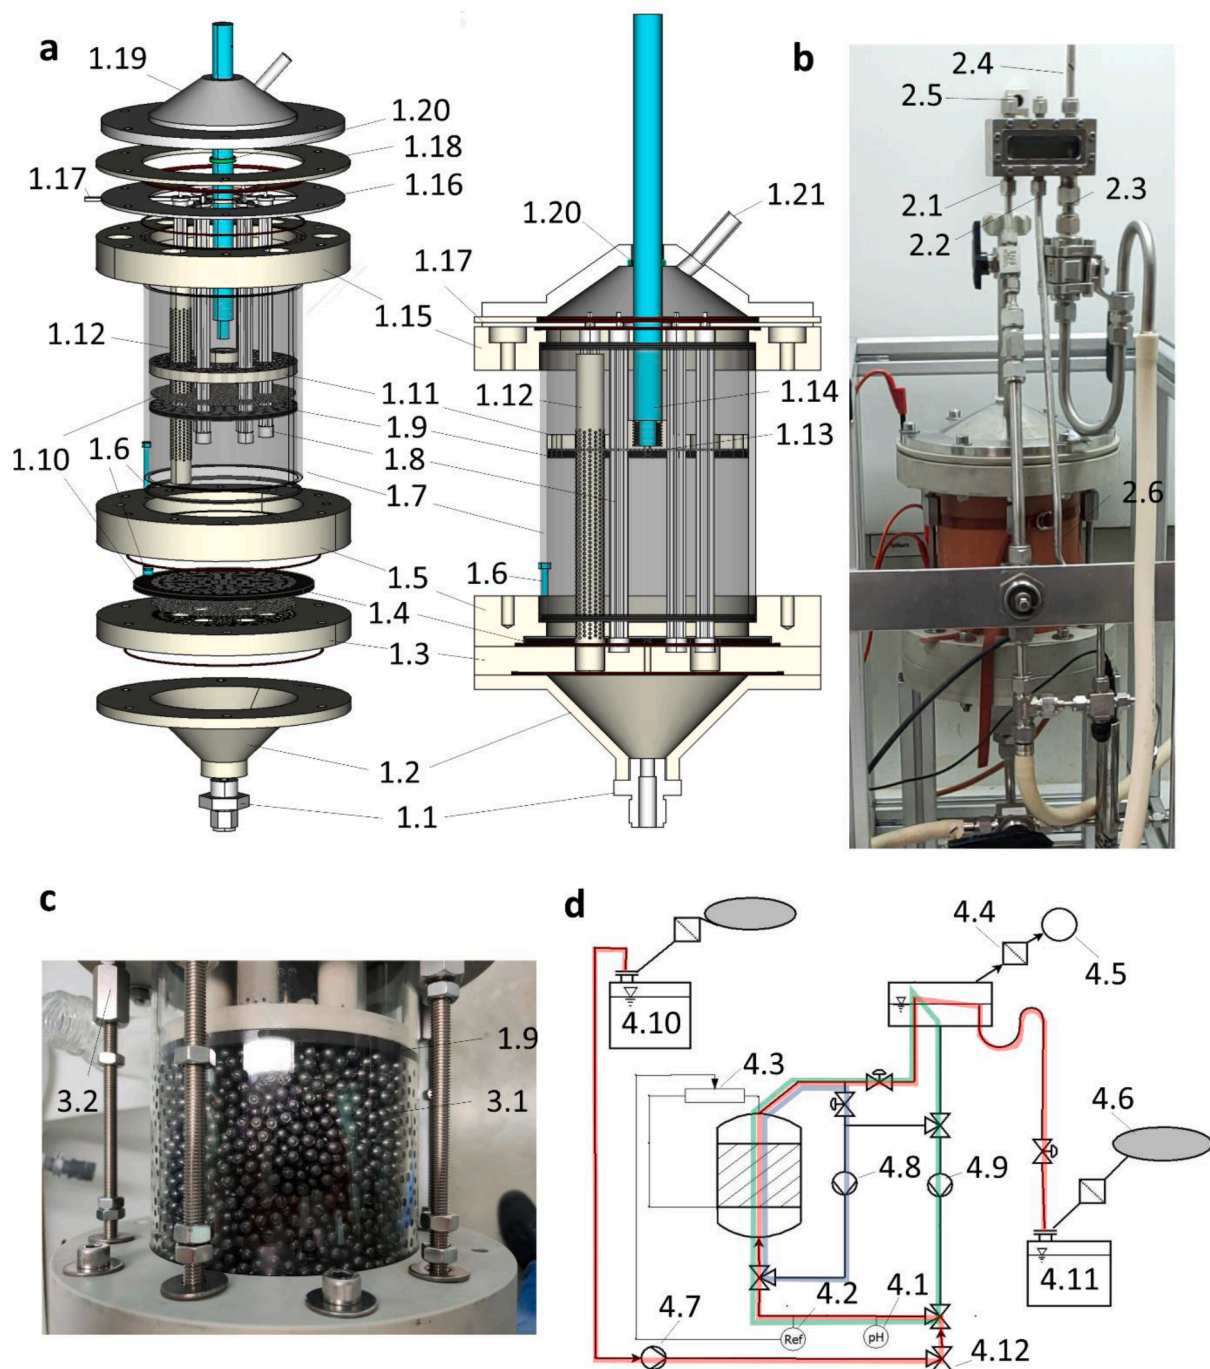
a: Exploded view drawing (left) and longitudinal section (right) of the CAD model of the bioelectrochemical packed-bed reactor /biofilter. Inlet of the fluid (1.1), inlet chamber (1.2), lower flange components (1.3 and 1.5), lower perforated graphite plate (1.4), titanium screw and titanium contact cylinder (1.6), borosilicate glass cylinder (1.7), steel rods as counter electrodes (1.8), upper perforated graphite plate (1.9), feed spacer (membrane technology) (1.10), insulating plate (1.11), perforated hollow cylinder for isolation (1.12), titanium screw (connection) or plastic screw (isolation) (1.13), titanium rod (1.14), upper flange (1.15), steel plate for counter electrode attachment (1.16) with connection to the potentiostat (1.17), plastic ring to separate steel cover and steel plate (1.18), steel cover (1.19), lip seal ring (1.20) and top outlet (1.21). b: Photograph of the reactor with mounting. Gas trap with inlet (2.1), circulation outlet (2.2), siphon outlet (2.3), gas outlet (2.4), liquid sampling spot (2.5), and electrical heating pad (2.6). c: Photograph of the packed bed of conductive spheres (3.1), upper perforated graphite plate (1.9).
